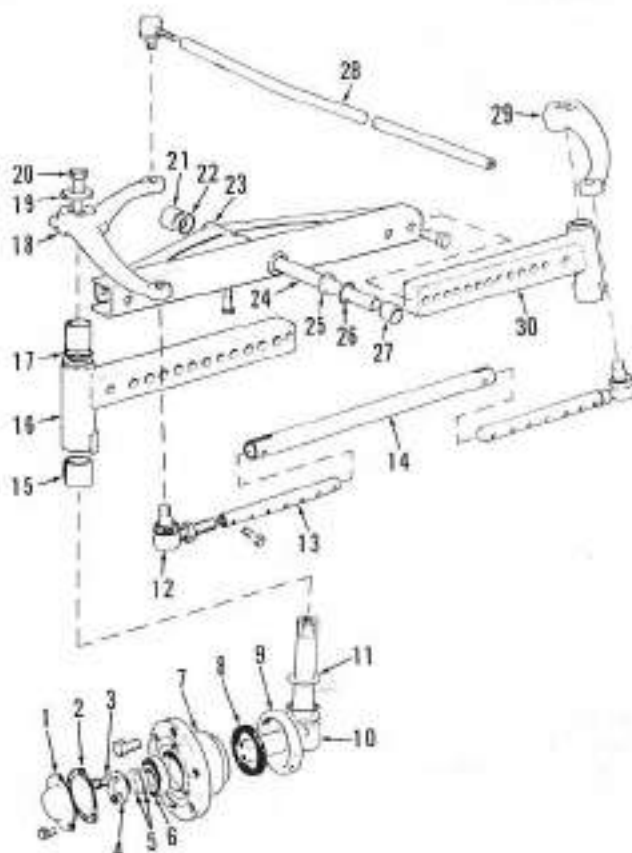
Exploded view of Model 885N front axle, wheel spindle, hub and bearing assembly. Note shims (5) used to adjust bearings.
